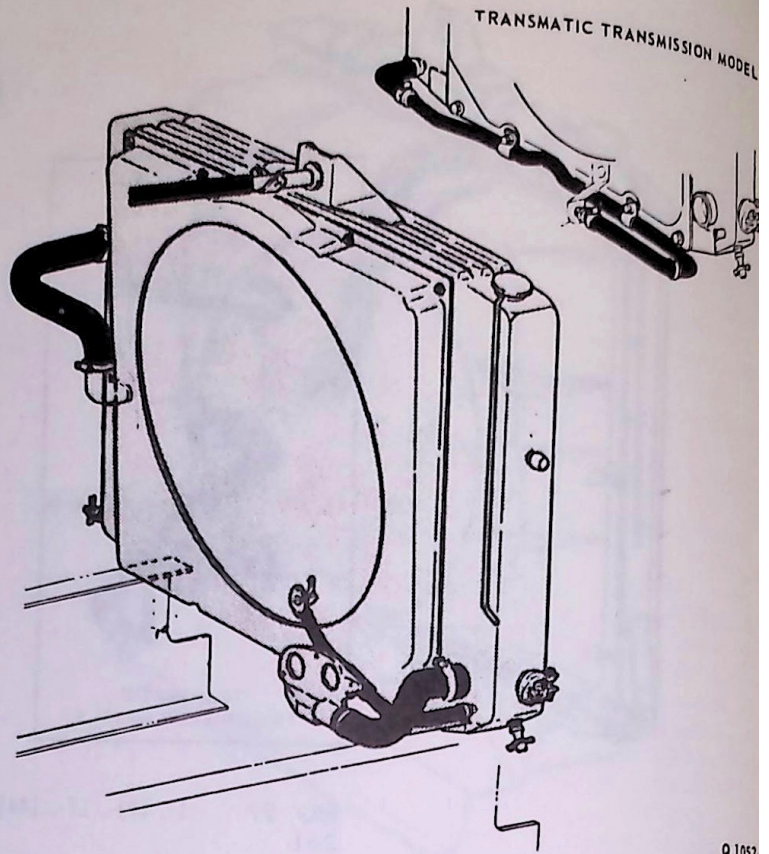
L-, LN-, LT-, LNT-8000 Radiator Installation—Ford V-8 Diesel Engines
